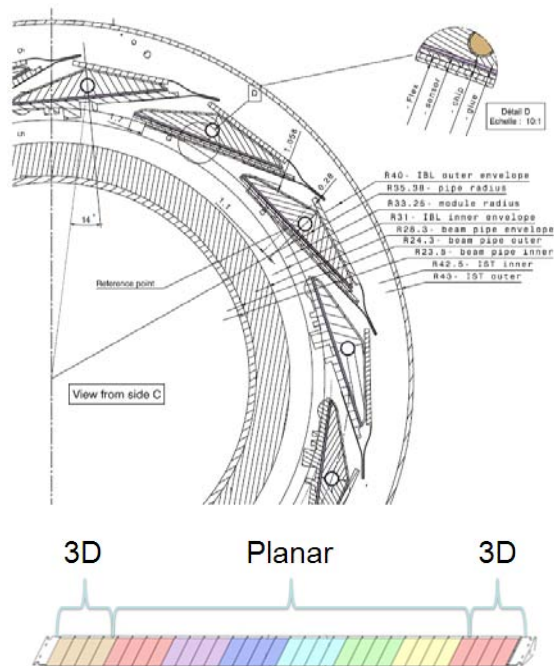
Top: Cross section detail of the IBL, beam pipe and IBL support tube. Distances are given in mm. Bottom: stave layout combining planar and 3D sensor technologies.
